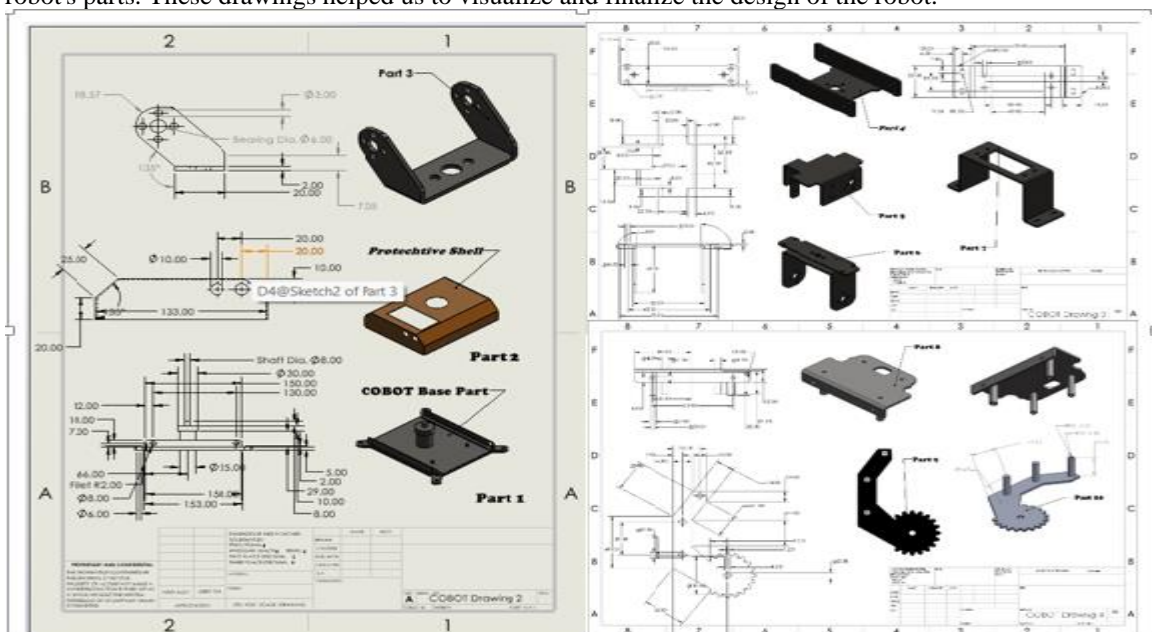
Detailed Drawing of COBOT with all views and dimensions mentioned in this Drawing
